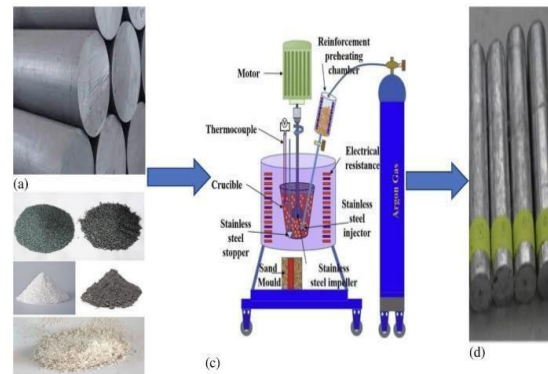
(a) Al-7075 Alloy, (b) Particulate Reinforcements, (c) Stir Casting Setup with sand mold and (d) Casted Specimens
